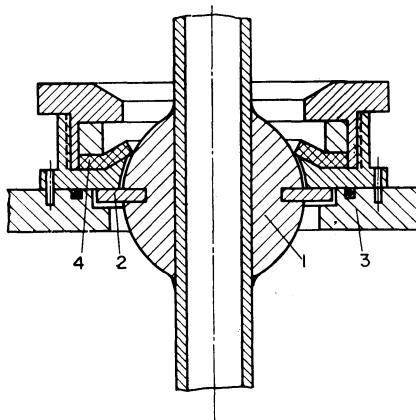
Wilson seal on spherical surface. After Brannen¹⁶¹ (*Courtesy of The American Institute of Physics*)
